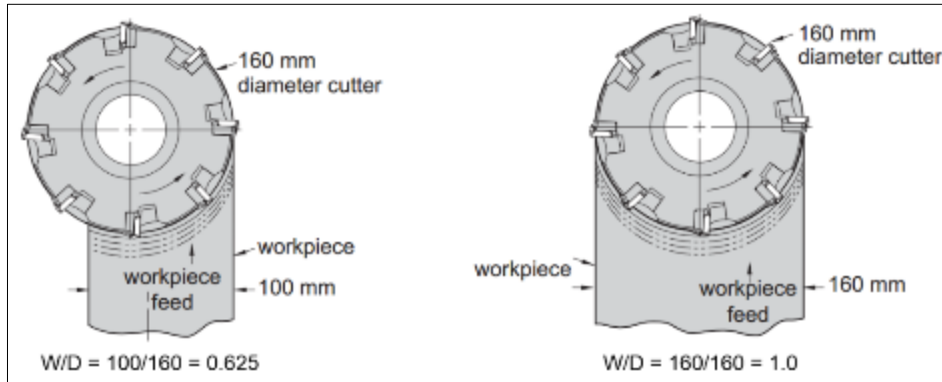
Top view of cutter bodies - Engagement factor of 0.625 (left) and 1.0 (right)
